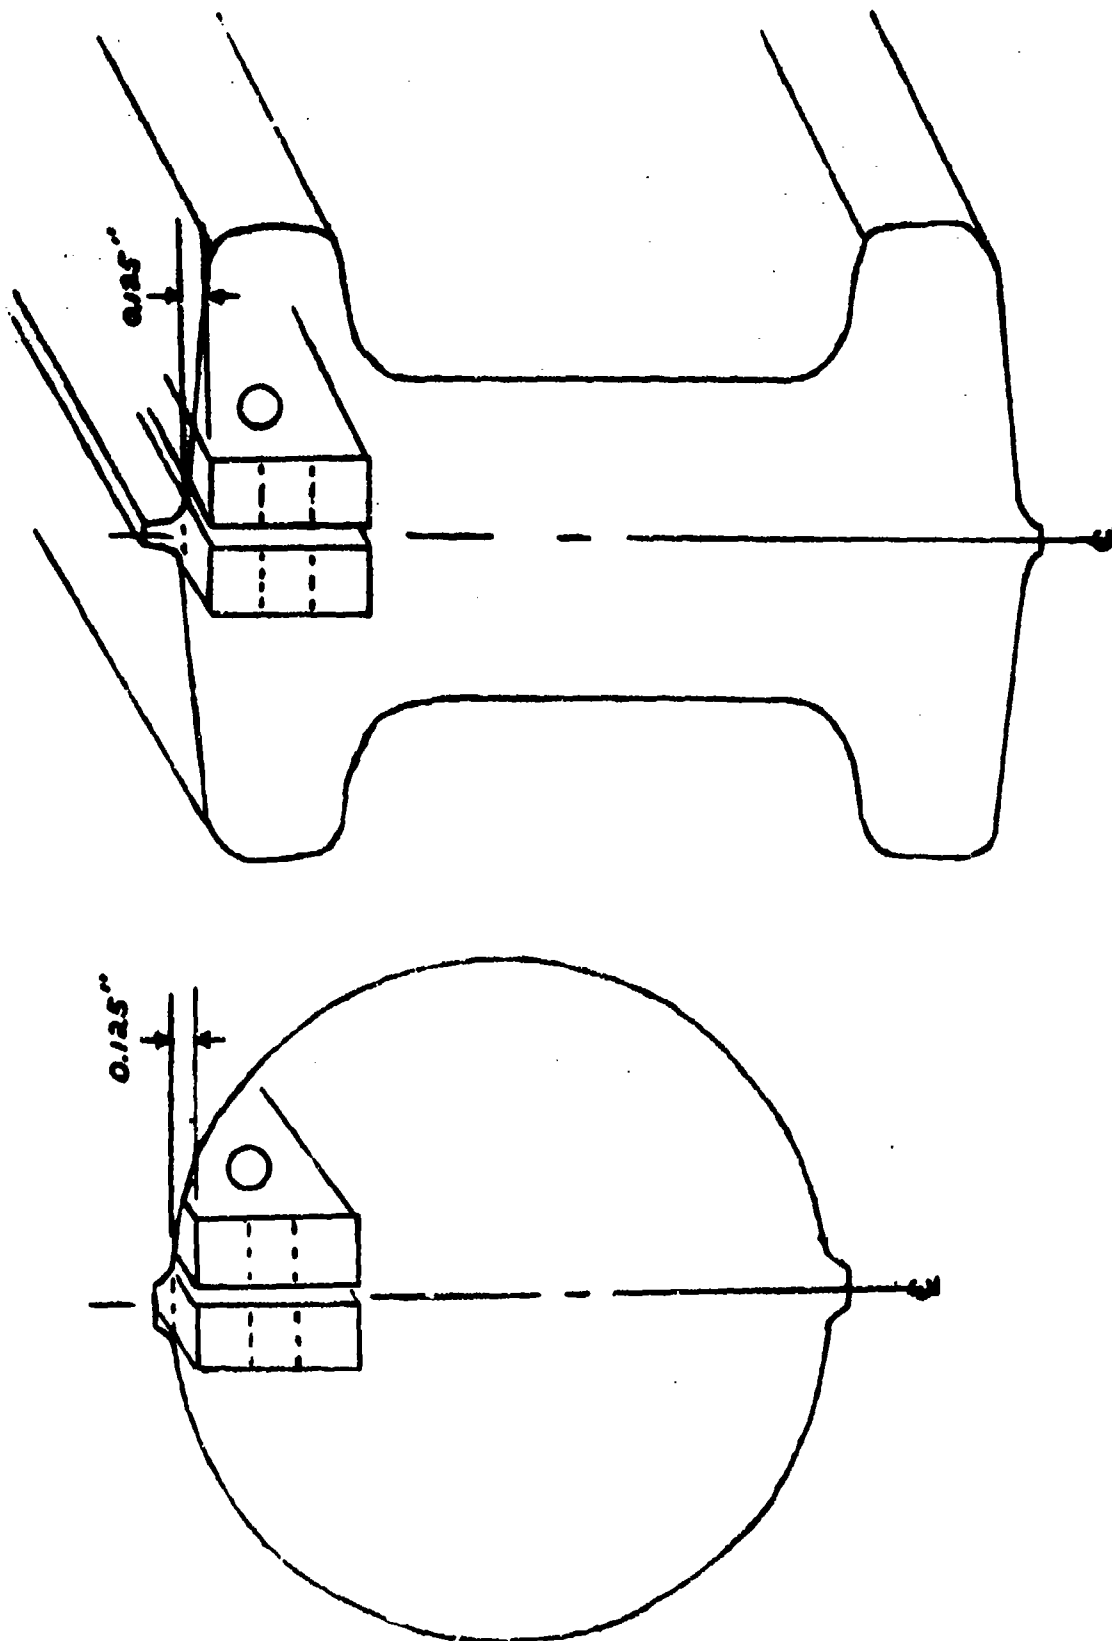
Sketches Showing Location of DCB Specimens Used for SCC Tests of Dle Potings
